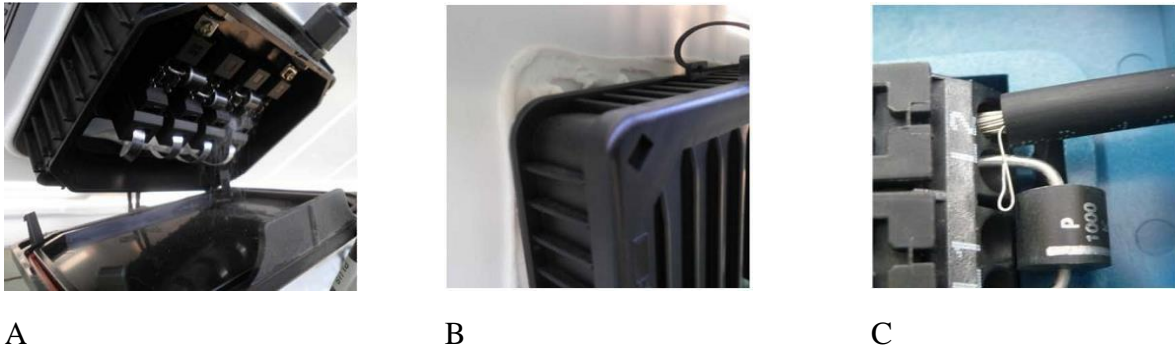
JB failures: a) an open JB in the field, b) a poorly bonded JB on the back sheet, c) a JB with poor wiring. [35]
